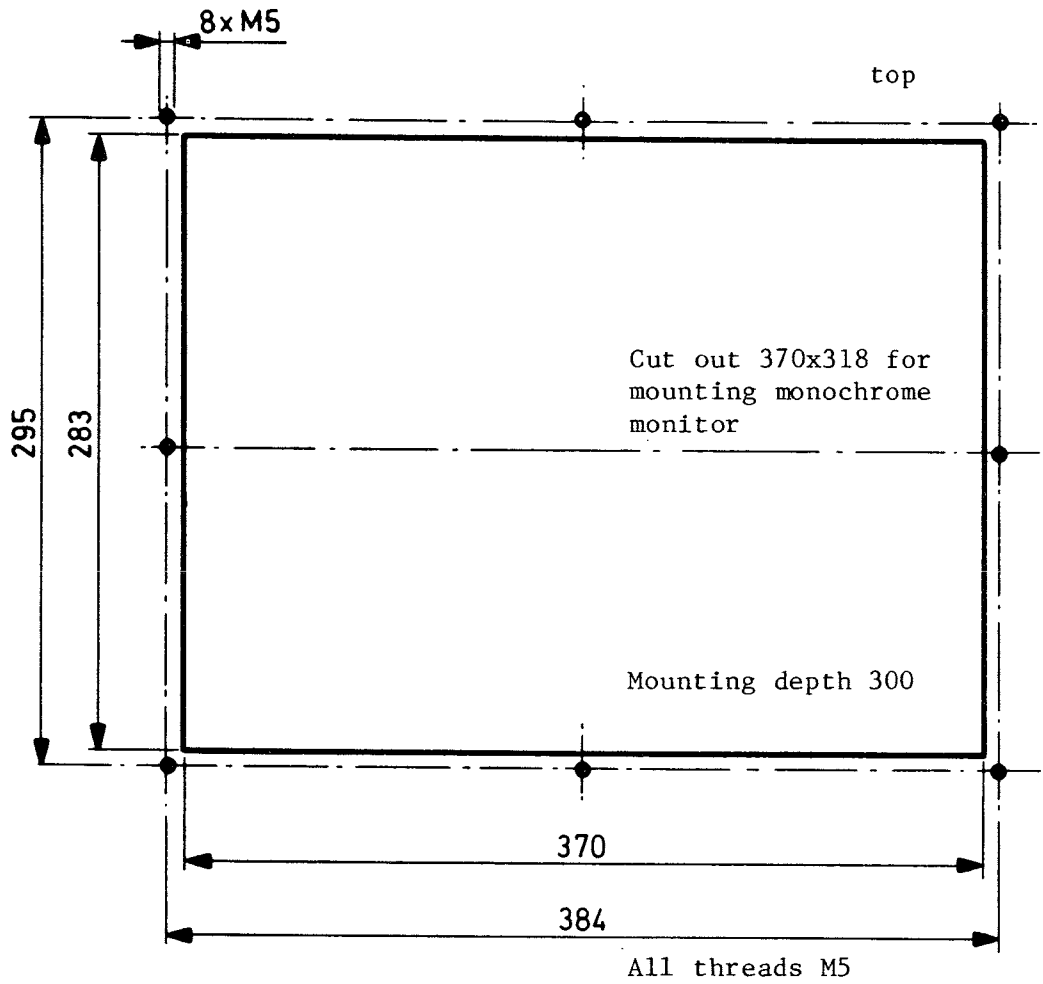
9 Mounting dimensions of 12" monochrome monitor
